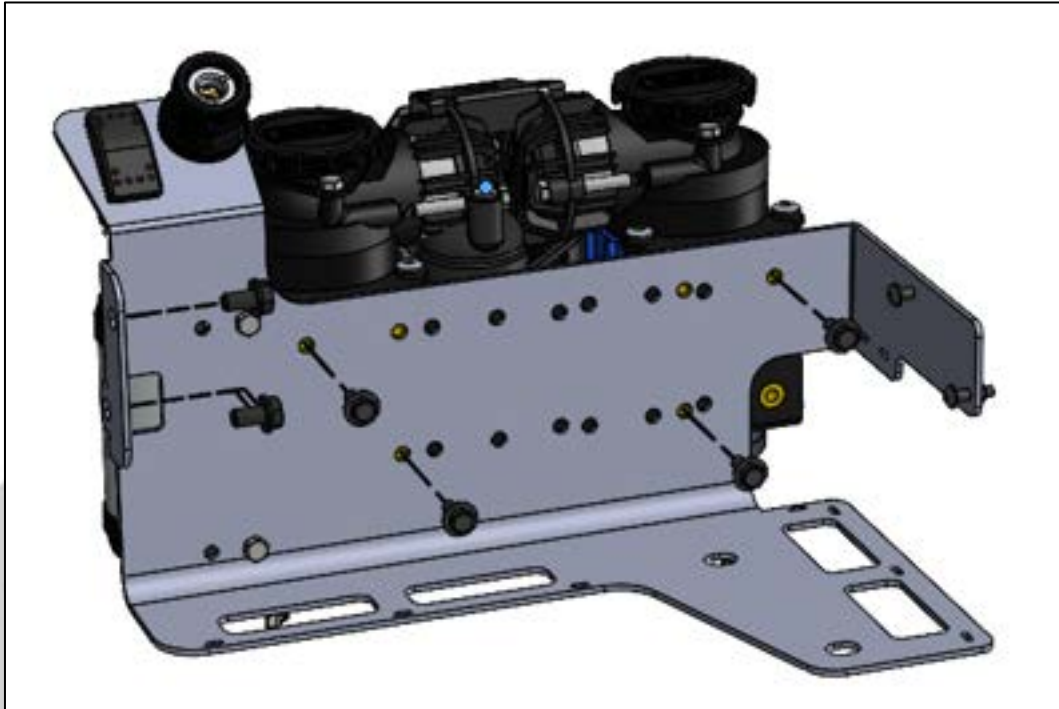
Brushed Twin Compressor bracket pre-assembly front view
